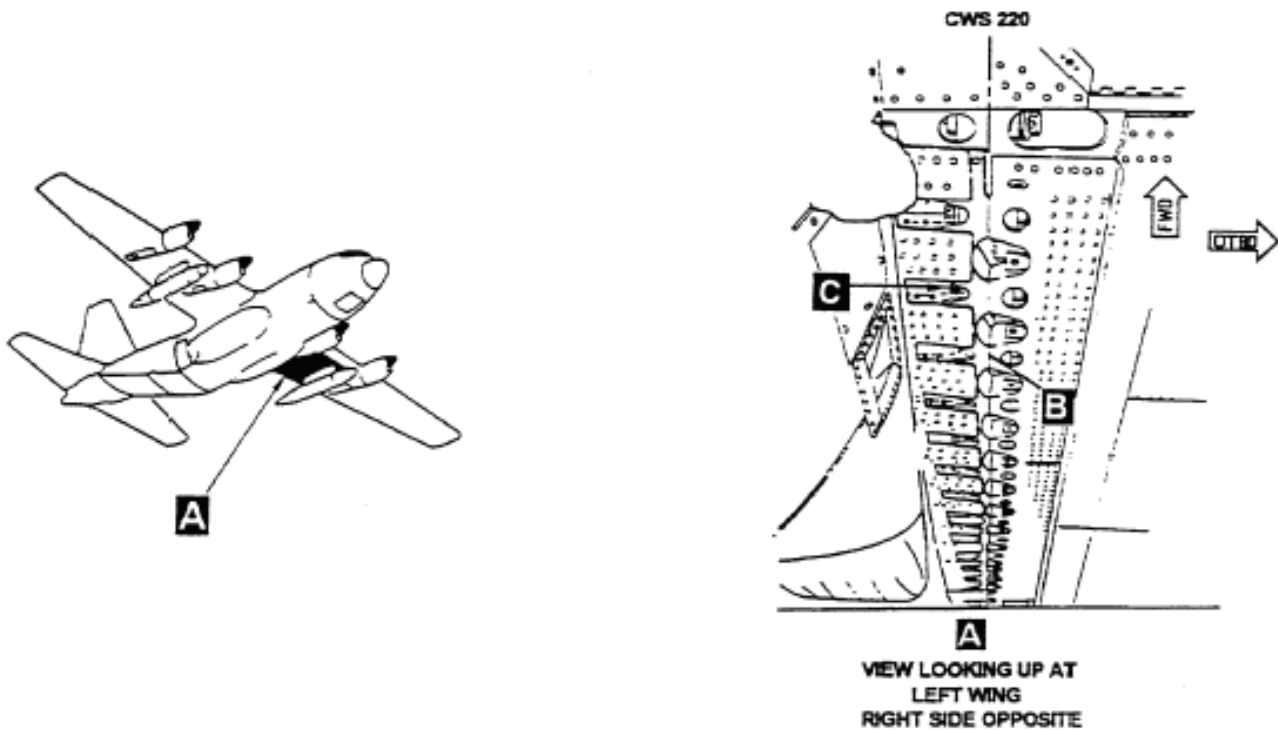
Inspection of Center Wing Lower Surface Rainbow Fitting (Sheet 1 of 2)
